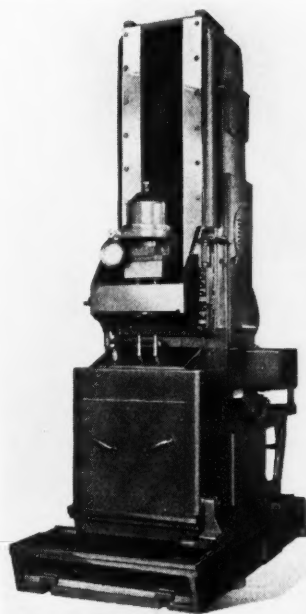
American Combination Hydraulic and Mechanical Broaching Machine
